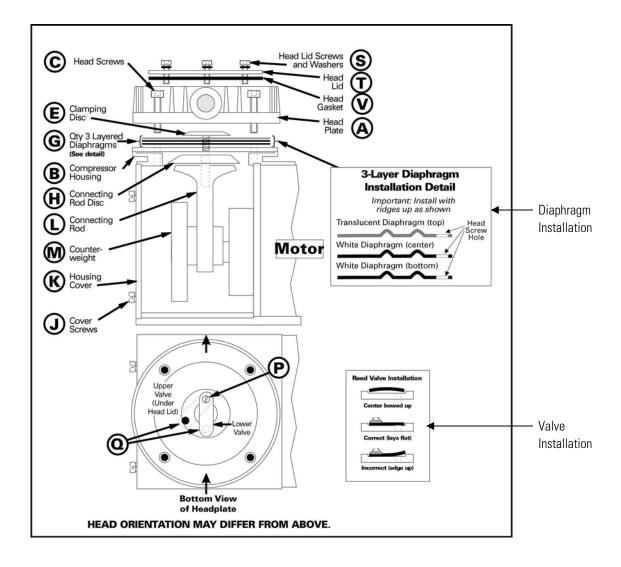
Vacuum Pump – Head Plate and Motor View
